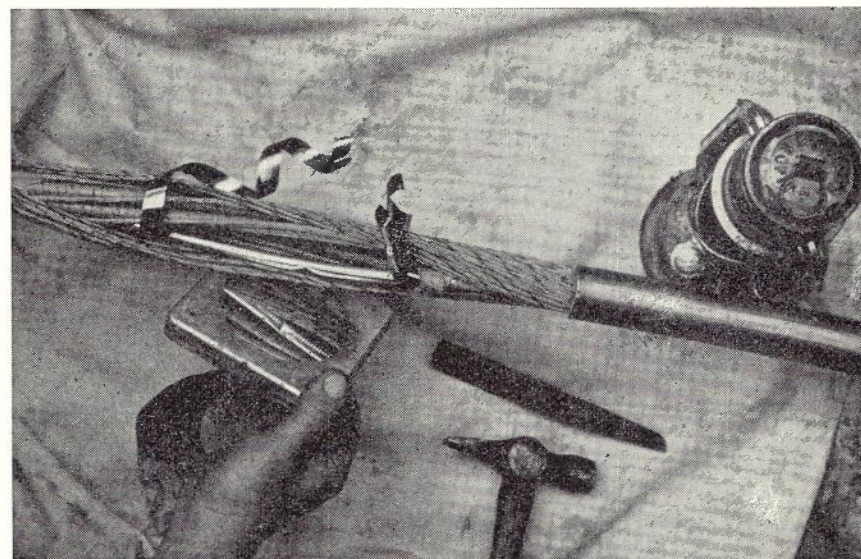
Dent in Coaxial Tube caused by manufacturing defect. This fault was cleared without making a joint in the tube by reforming the outer conductor.
